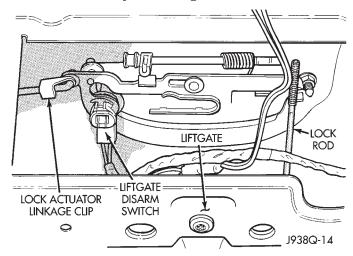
Liftgate Lock Cylinder Switch Remove/Install
